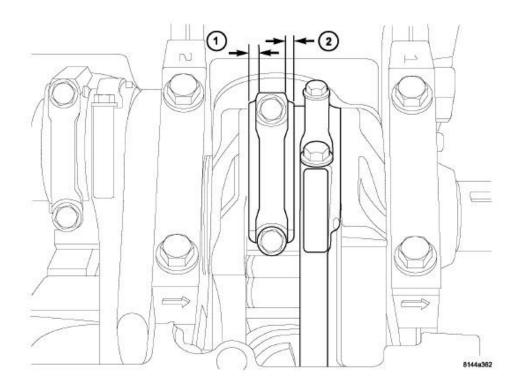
CONNECTING ROD REMOVAL/INSTALLATION Courtesy of CHRYSLER LLC
